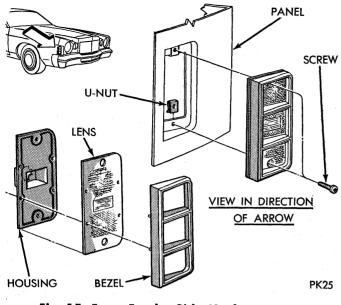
Front Fender Side Marker Lamp— Carline S and X
